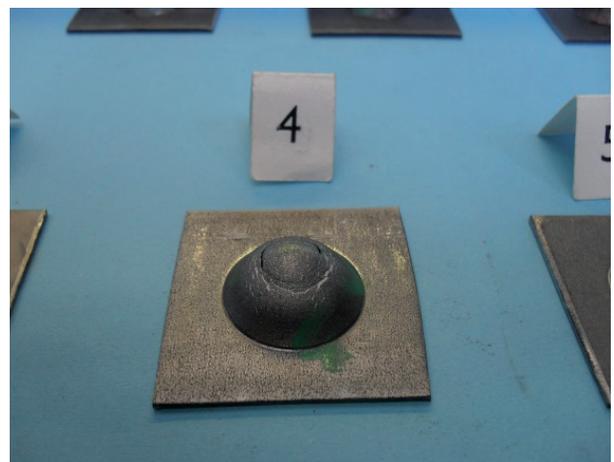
Crack of steel 11 321, after DRECE 6x180°
